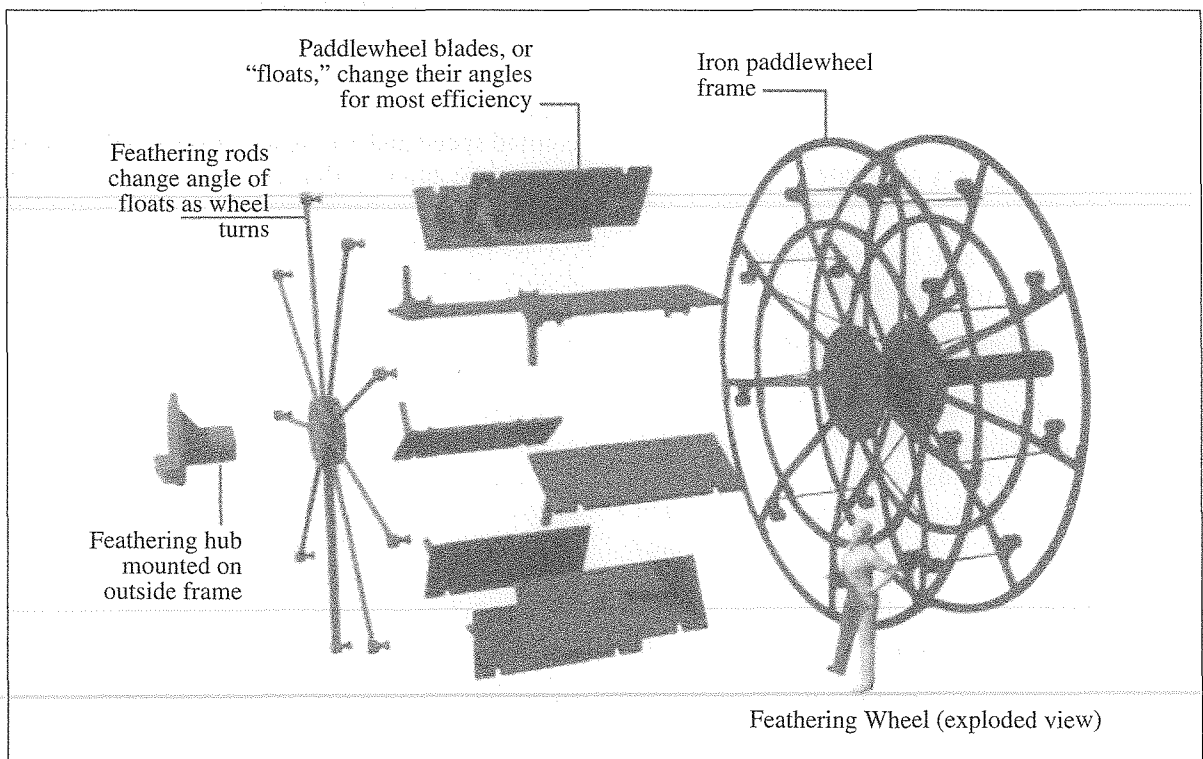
Exploded view of the *Denbigh's* paddlewheel and feathering mechanism. Illustration by Andy Hall.
